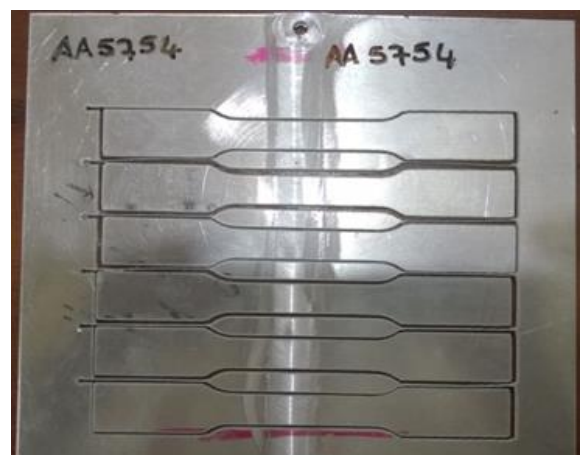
From welded sheets (ASTM E8M-04) cutting with a water jet of the appropriate standard tensile samples [13].
